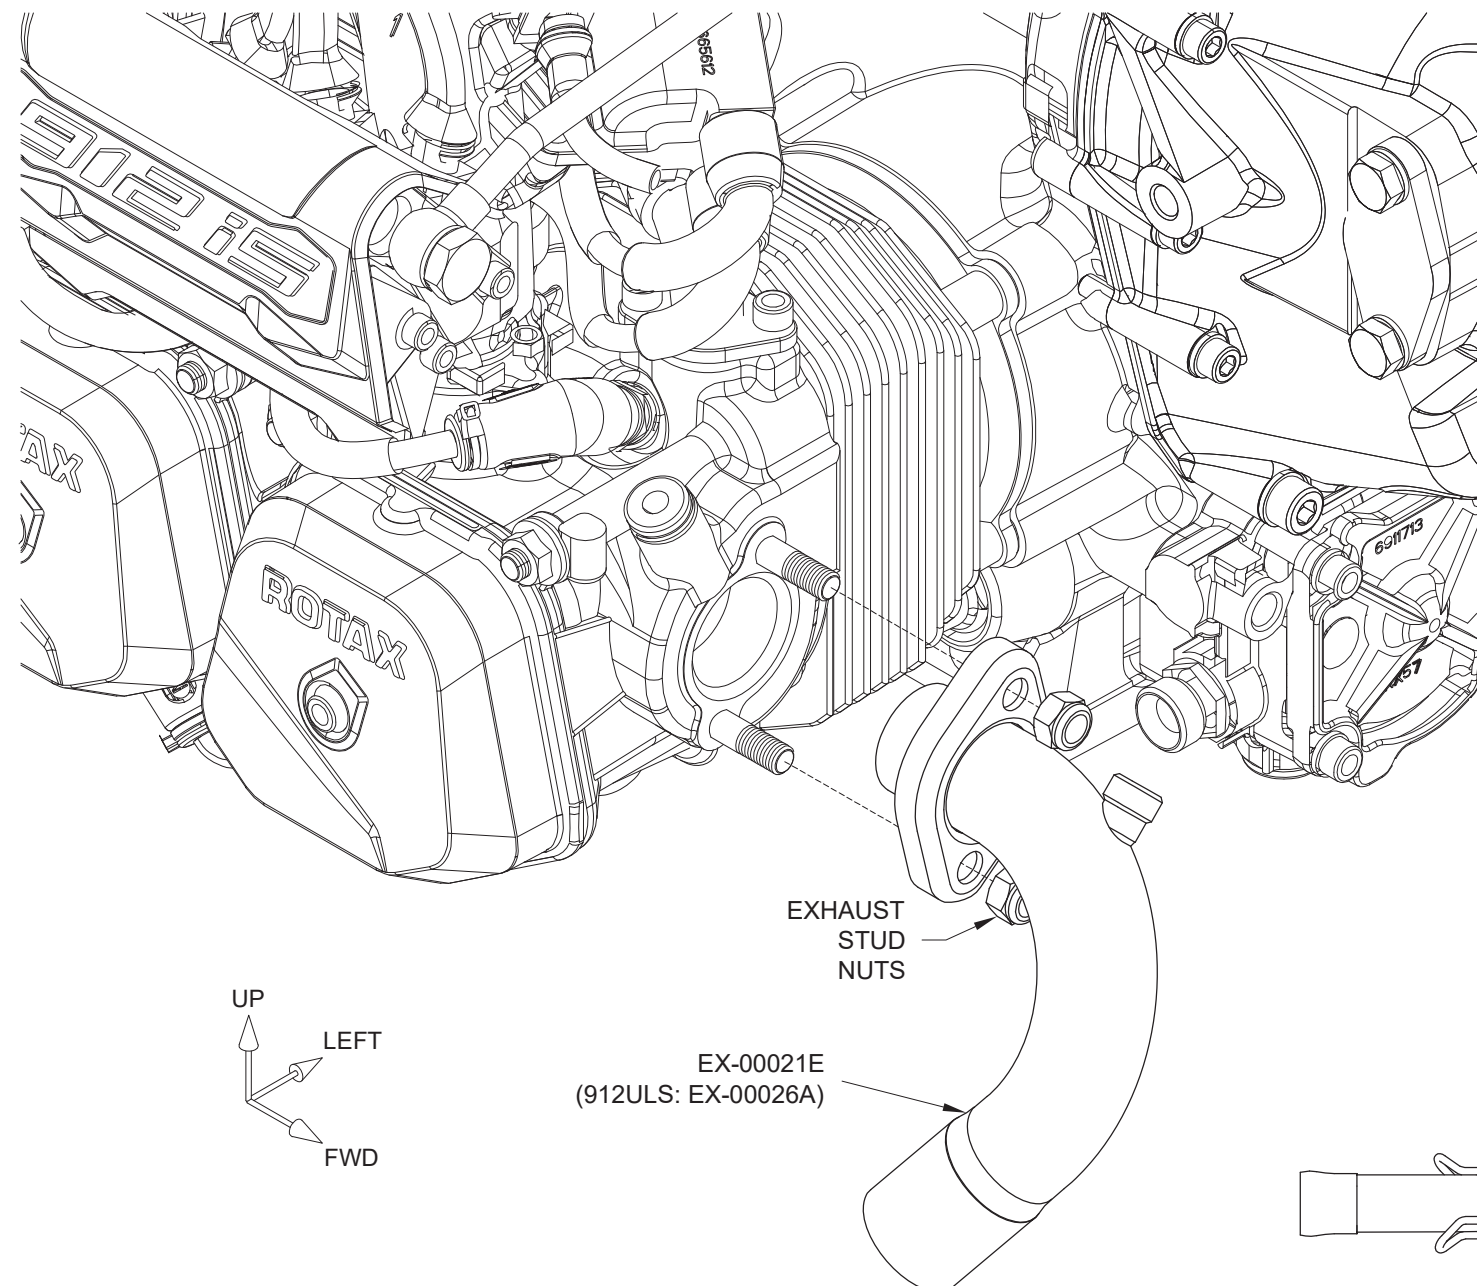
CYLINDER #1 EXHAUST INSTALLATION
